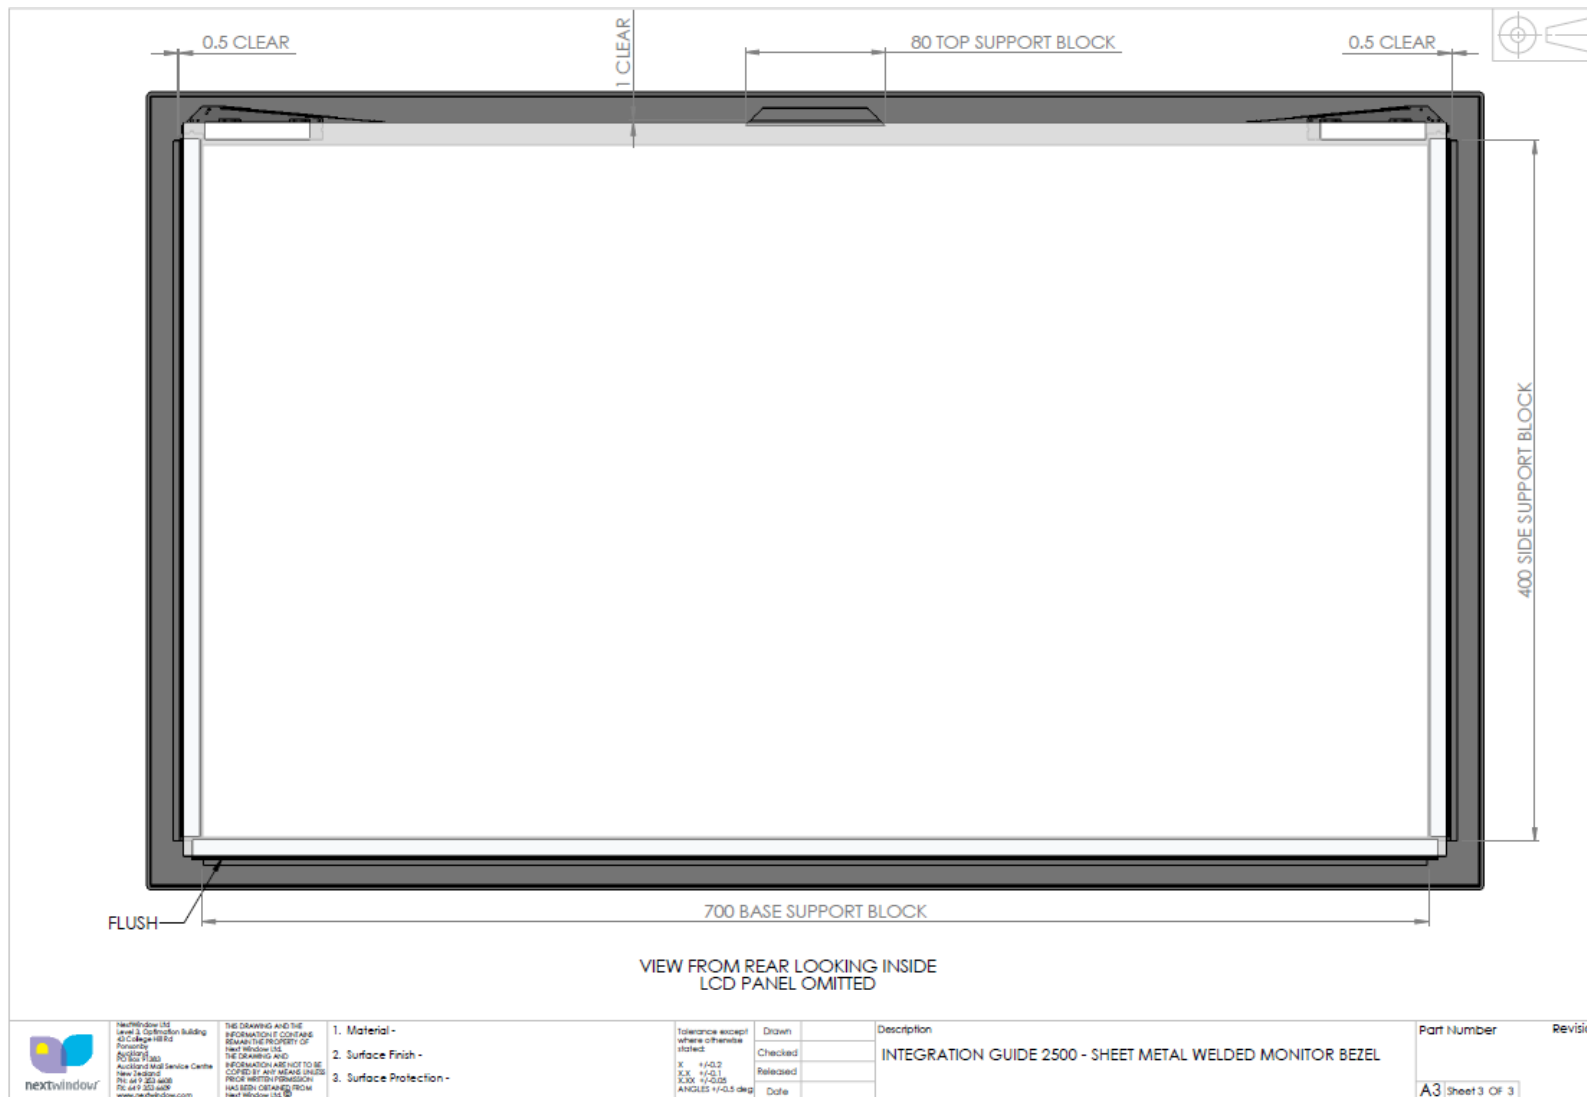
Rear view of welded monitor bezel showing integrated 2500 touch screen
